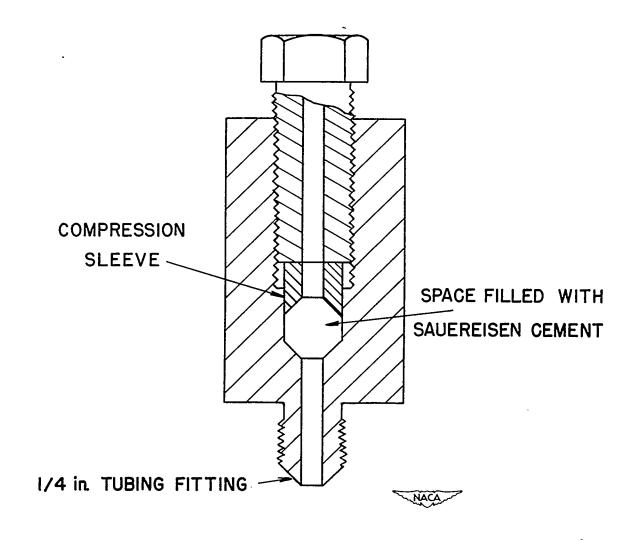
Thermocouple lead seal assembly. Twice full scale.
